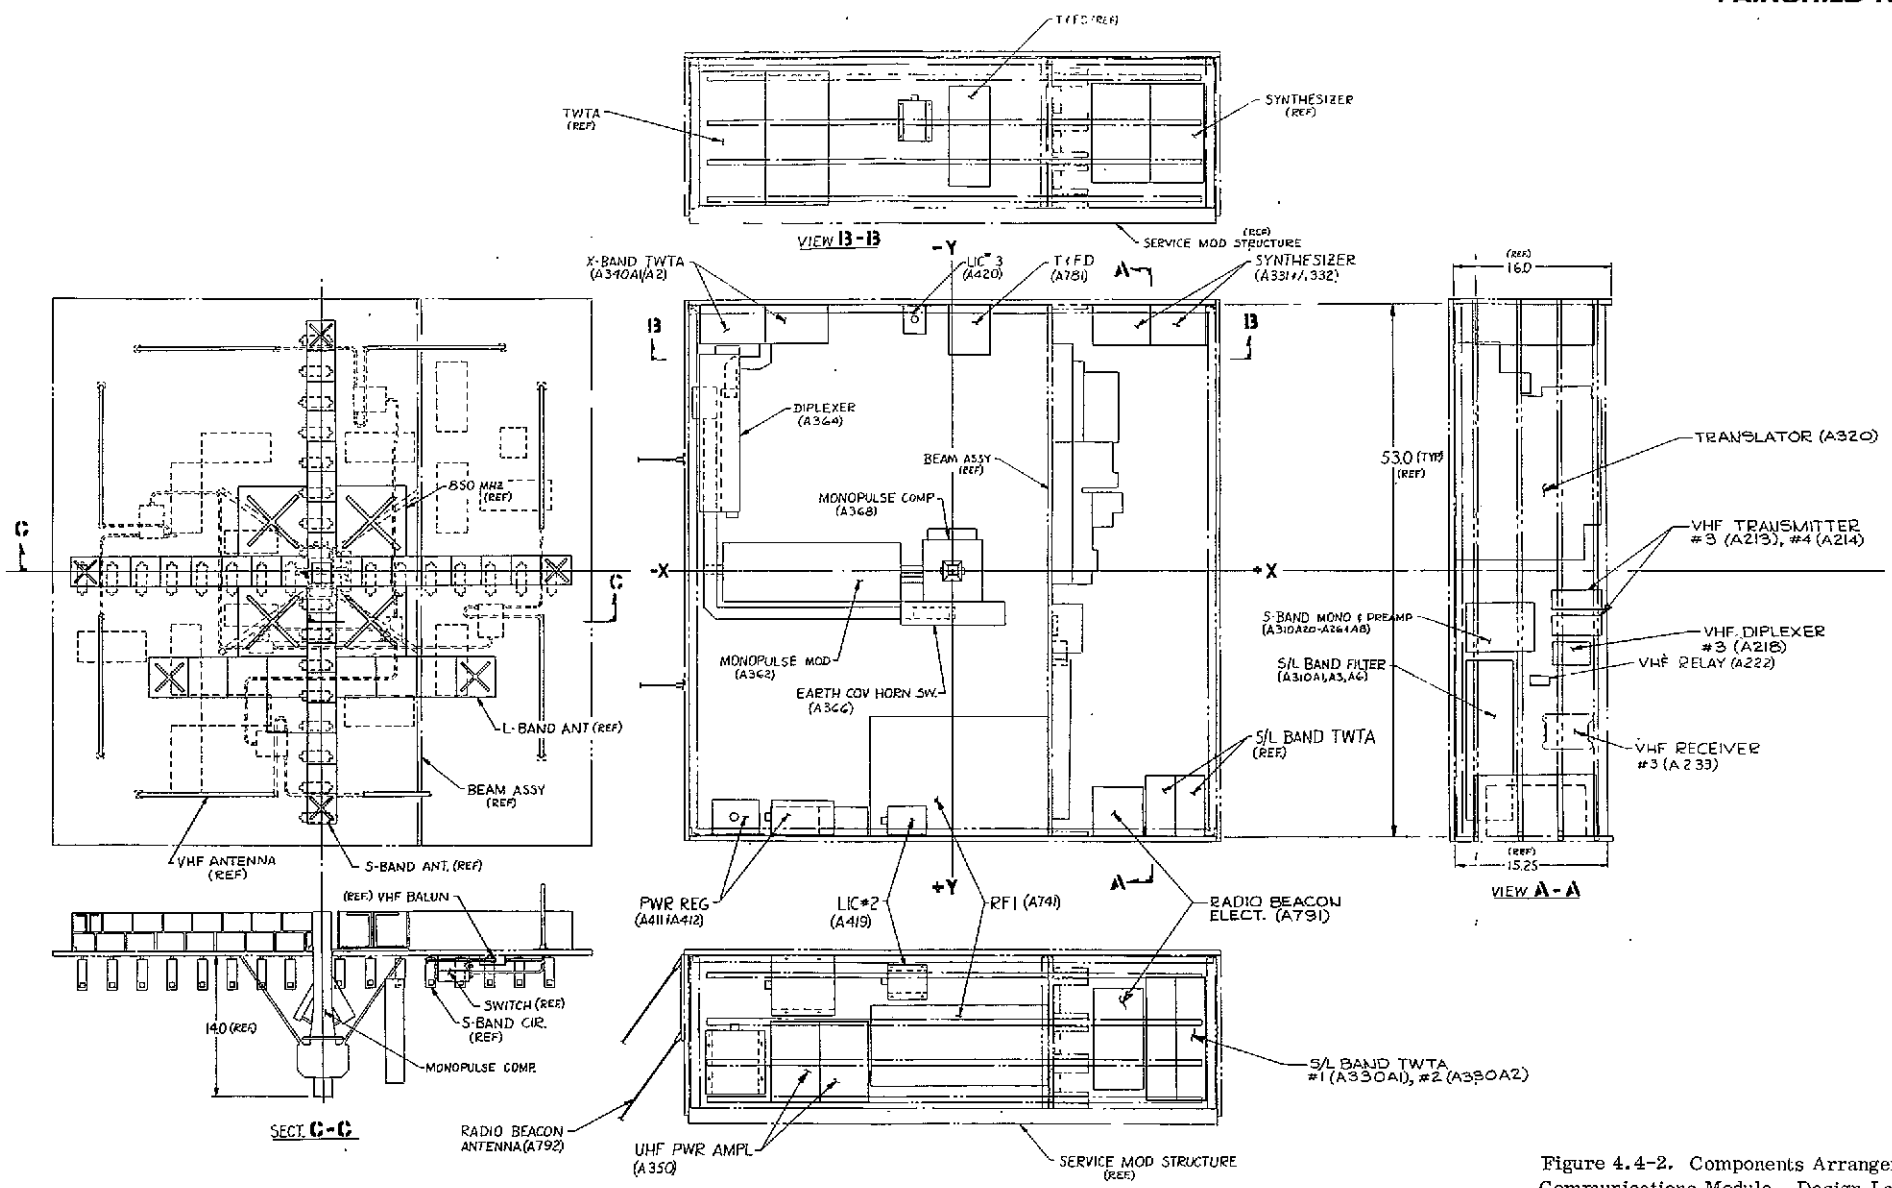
Components Arrangement - Communications Module - Design Layout
